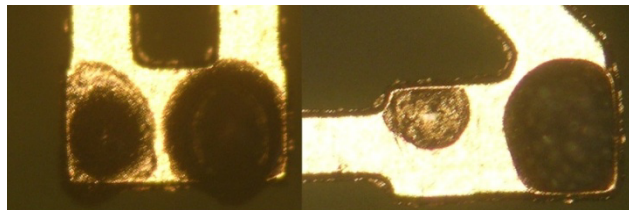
Photograph showing stencil printing of the ICA-B (left) and ICA-A (right) for the boards S1 – S8 used for shear tests.
